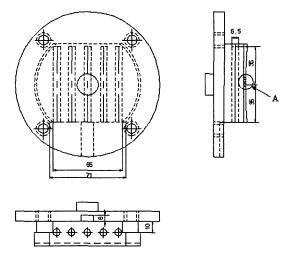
Molding machine and press-type mold for DSF; press-type mold for DSF.
